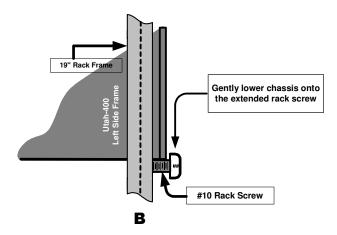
Lowering the Utah-400 Chassis on the Rack Screw
